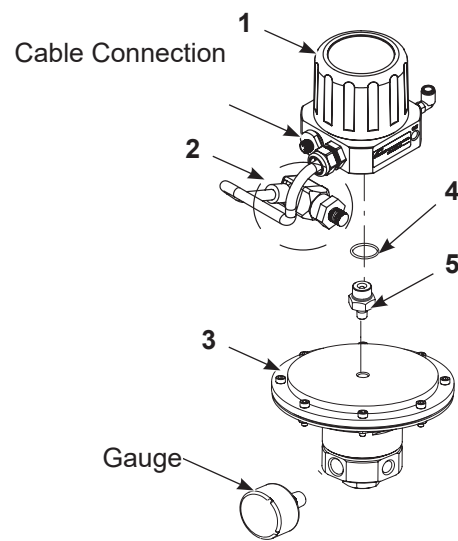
Electronic Pressure-Reducing Regulator Assembly
